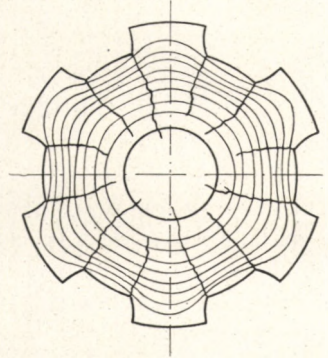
Typical form of fatigue fracture in splined shafts
